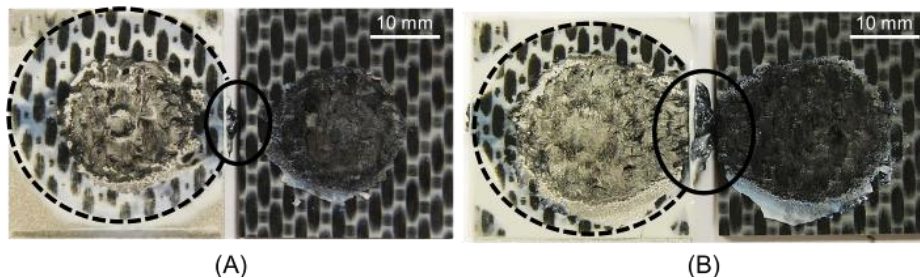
Example of fracture surfaces of FSp joints with interlayer: (A) condition L and (B) condition H.
